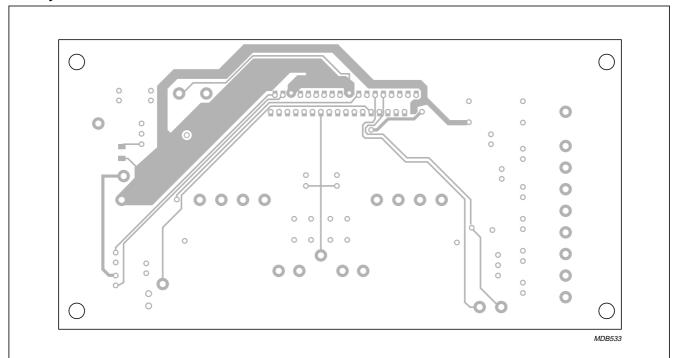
Top of printed-circuit board layout of test and application circuit showing copper layer viewed from top.
